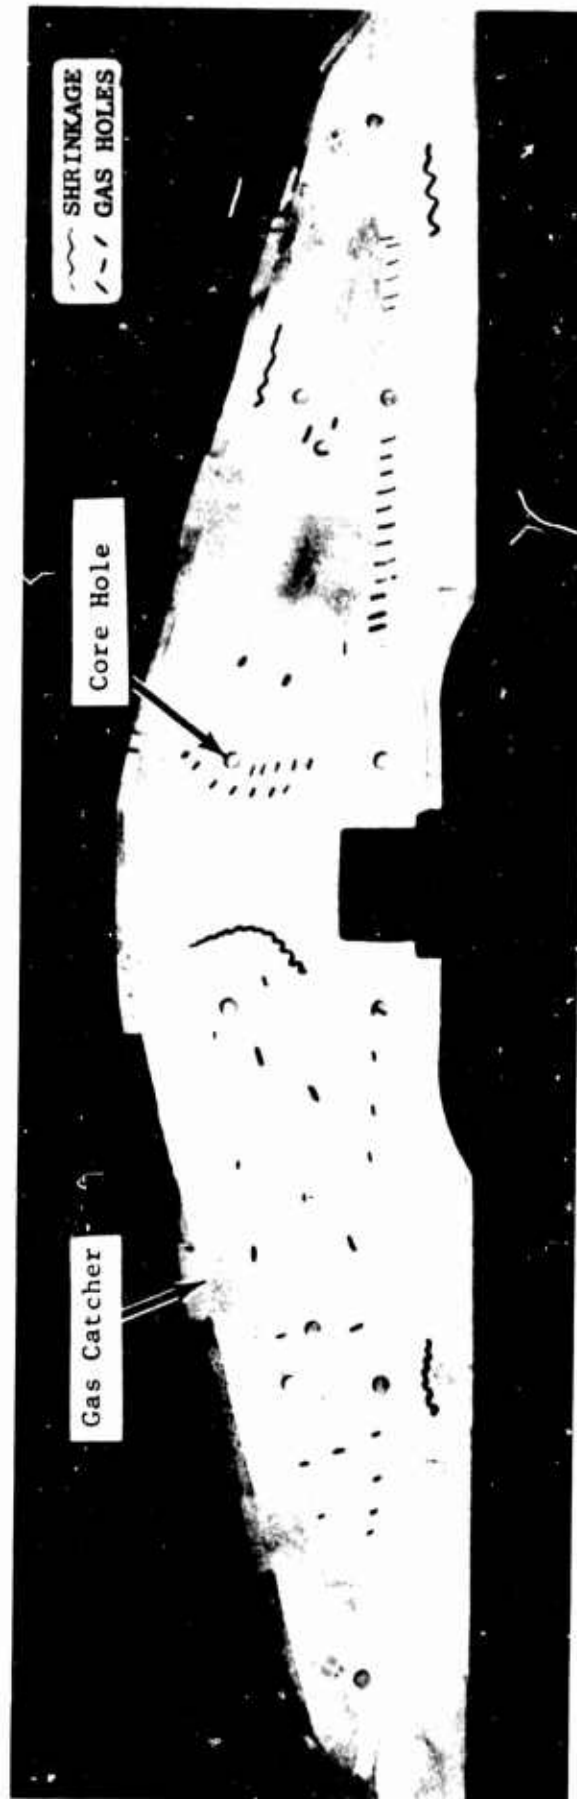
Major 12 to 6 O'clock A356 Aluminum as Cast Strut Showing Problem Areas, Gas Catcher Locations, Size, and Core Holes.
